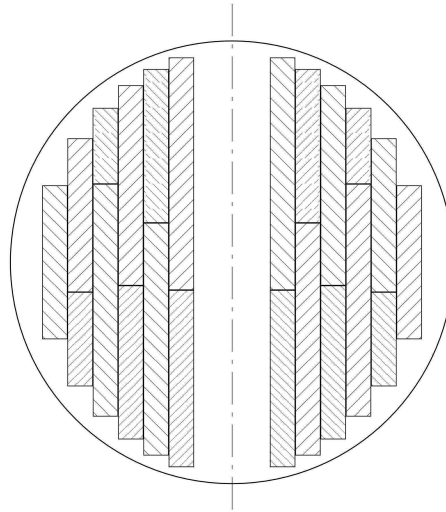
Cross section of the driver, showing the D-shaped driver inserts
